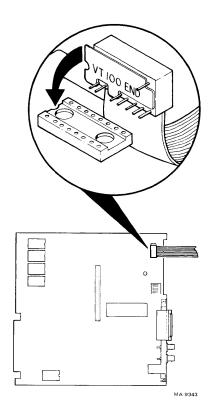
16 Pin Flat Cable on Terminal Controller
